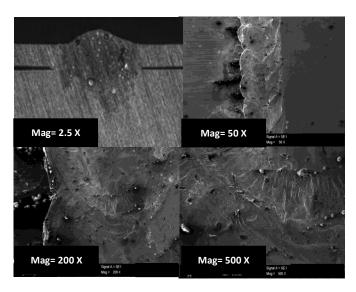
T11 Sample 2.5x-50x-200x-500x Magnified Weld Penetration Zone
